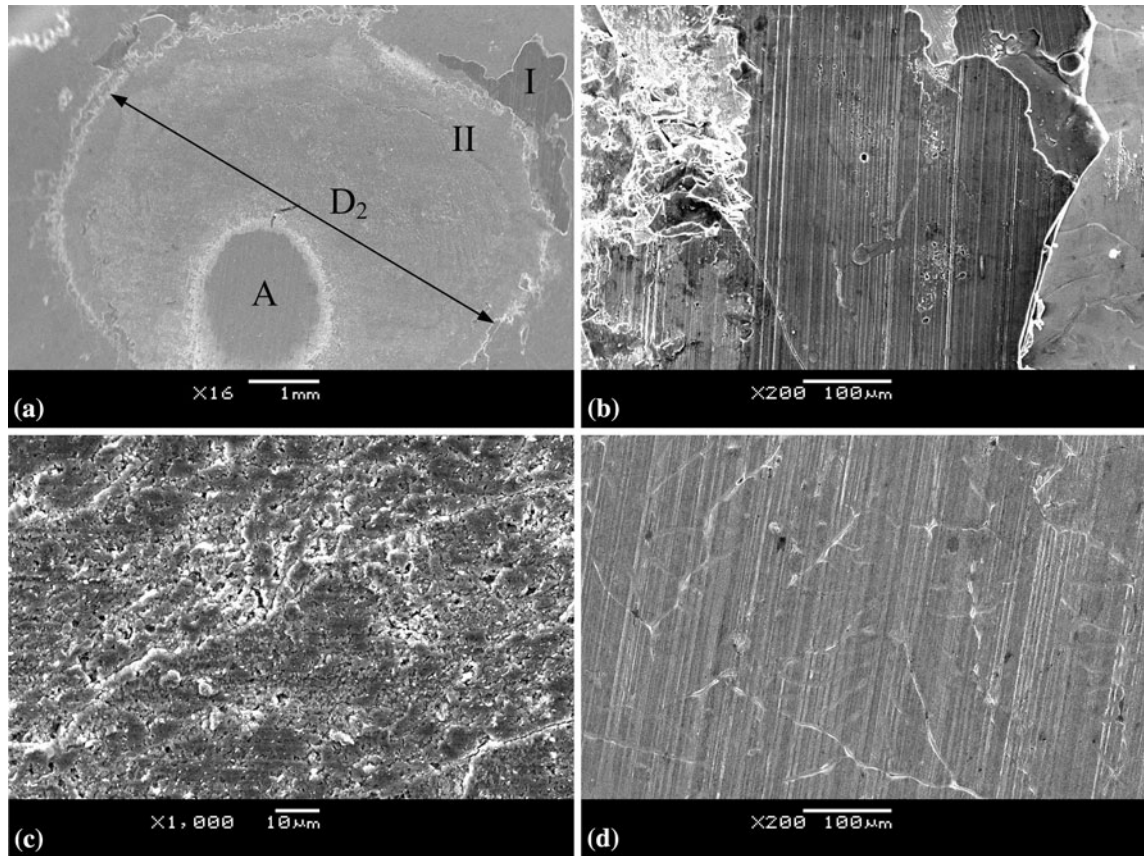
Fracture morphology of weld with one cycle welding time, at (a) steel side; (b) details of region I, the squeezed Zn; (c) details of region II, the joined area; and (d) details of zone A, the unmelted area.
